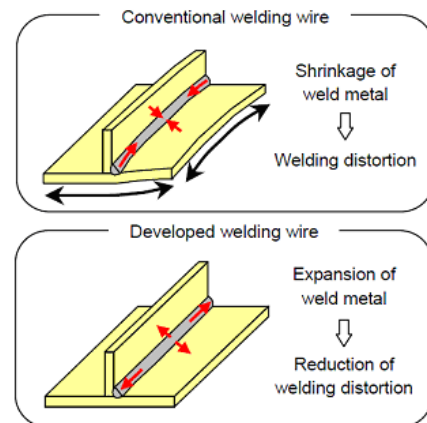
Deformation of mild steel plates joined with a single pass weld using two types of consumables [19]
